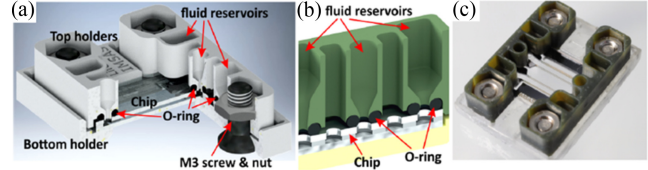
Development of accessory components for MPS research using 3D printing. Assembly of a microfluidic chip with a custom 3D-printed holder system (a) Schematic of the assembled system, (b) Cutaway view highlighting the reservoir and O-ring interfaces, and (c) Photograph of the final assembly [55] (Adapted from Ref. 55 on the basis of OA)
